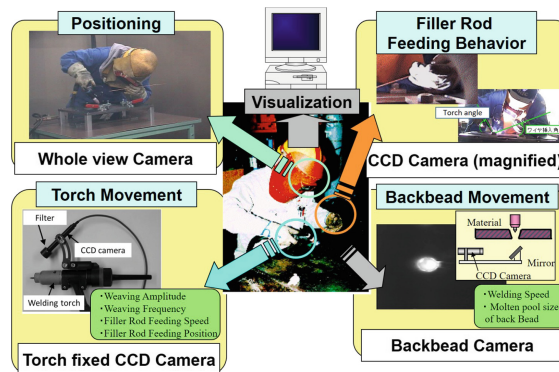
Measurement system of welder behavior for TIG welding
